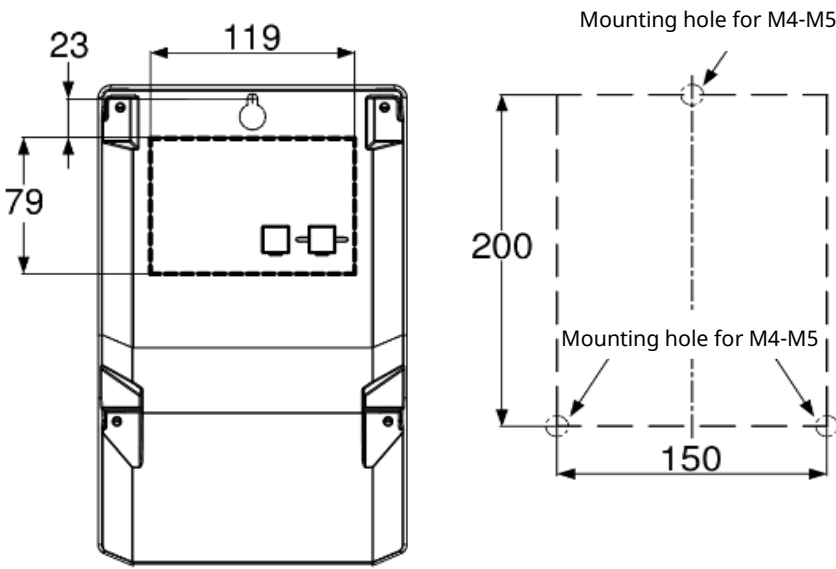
Panel cutout and Drilling point for installation (dimension in mm.)
